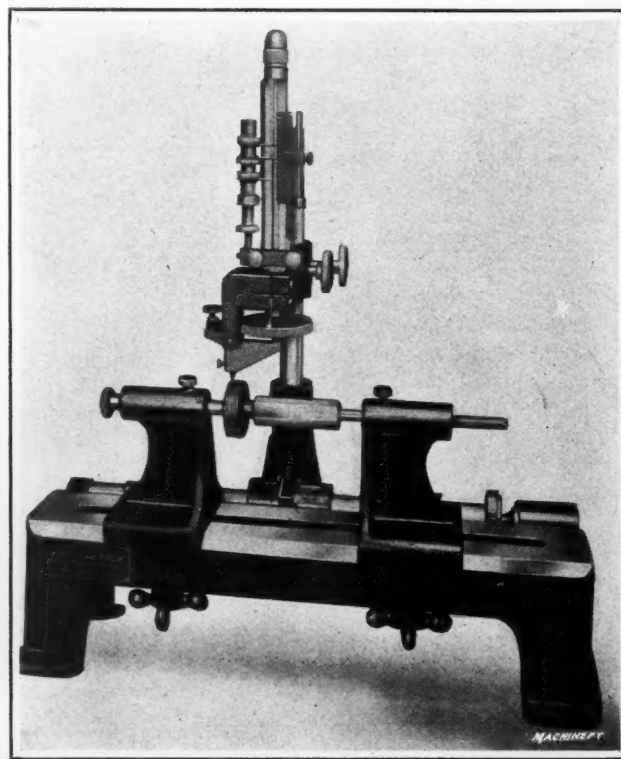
Same Machine shown in Fig. 5 but equipped for measuring Lead of Male Thread Gage
